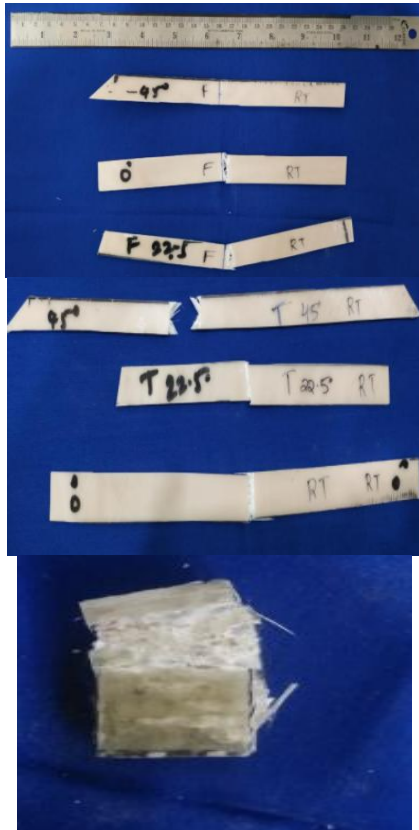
Tested specimens of UTS, flexural, Impact and compression
